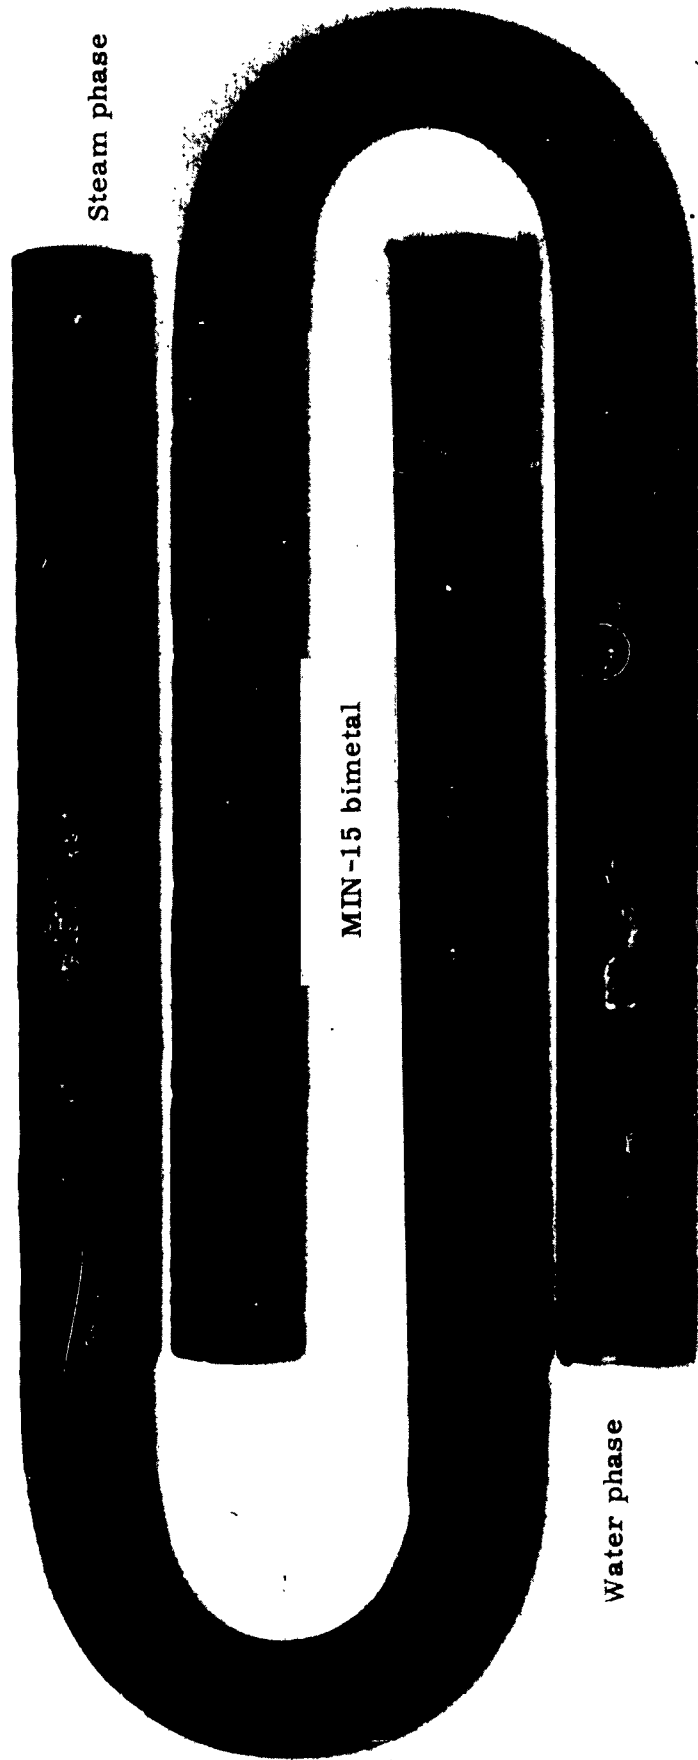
Bimetal Tubing From MIN 15 After Removal of the Corrosion Film. Note Severe Pitting in the Vapor Phase
